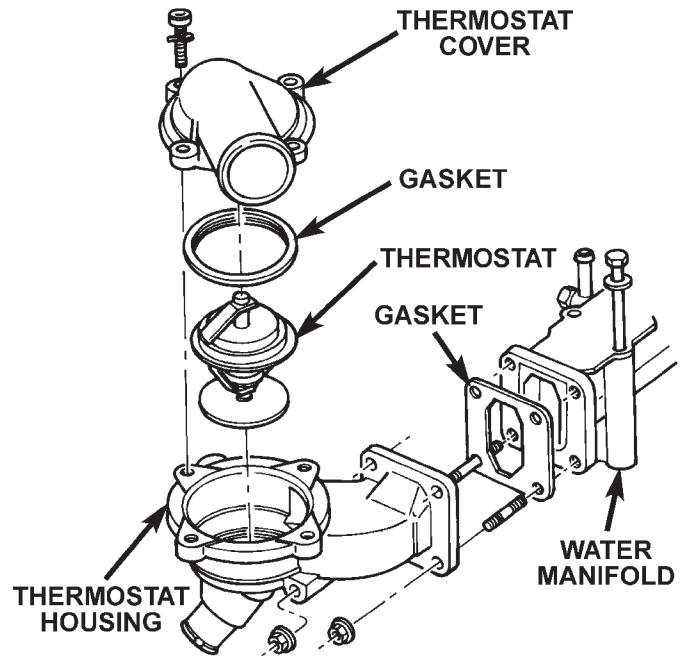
Thermostat and Housing — 2.5L VM Diesel
